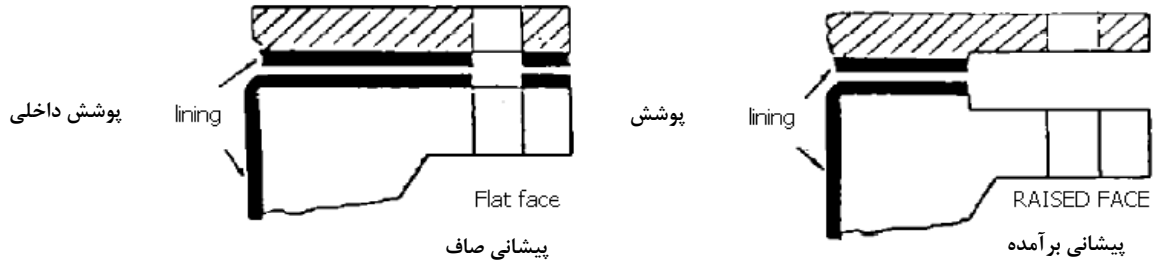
RUBBER LINED PIPE FLANGE ENDS
